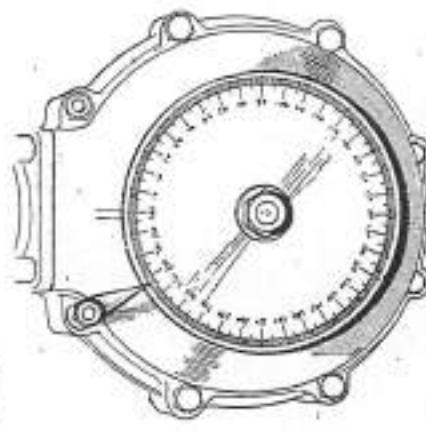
SHOWING CHAMBERS DISC FOR VALVE AND INJECTION TRIMMED.
